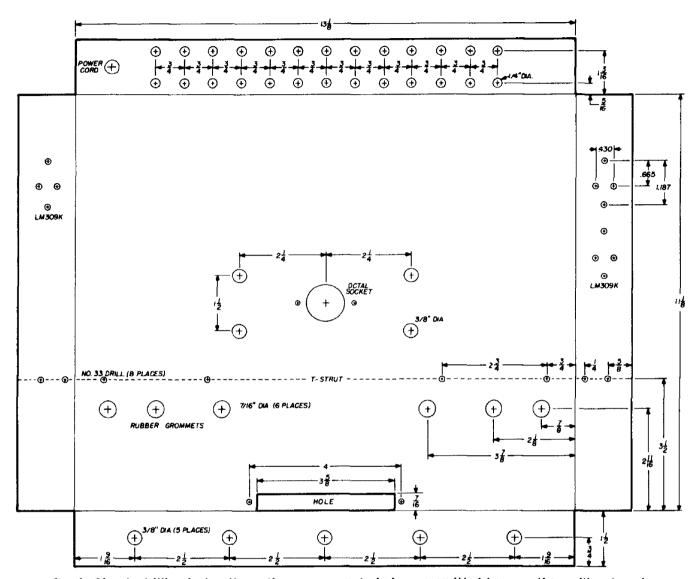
Chassis drilling instructions; the power-supply holes are omitted because they will not apply for different parts.
